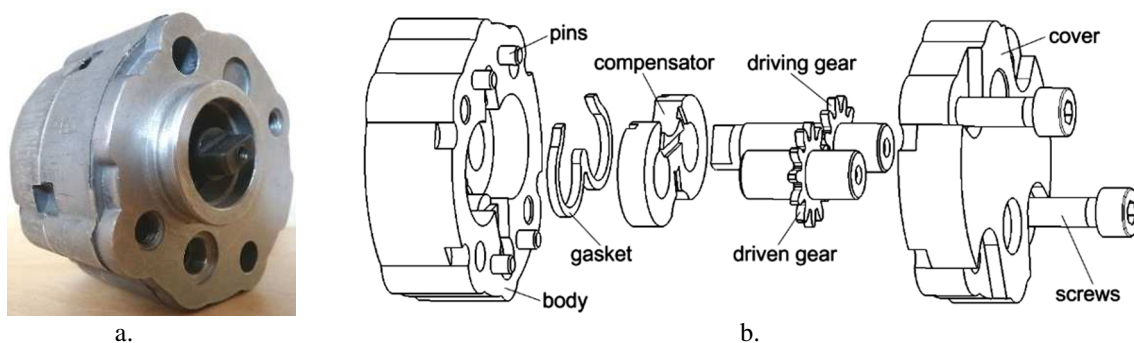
a. Real spur gear pump and b. 3D CAD representation – exploded view with all its components
